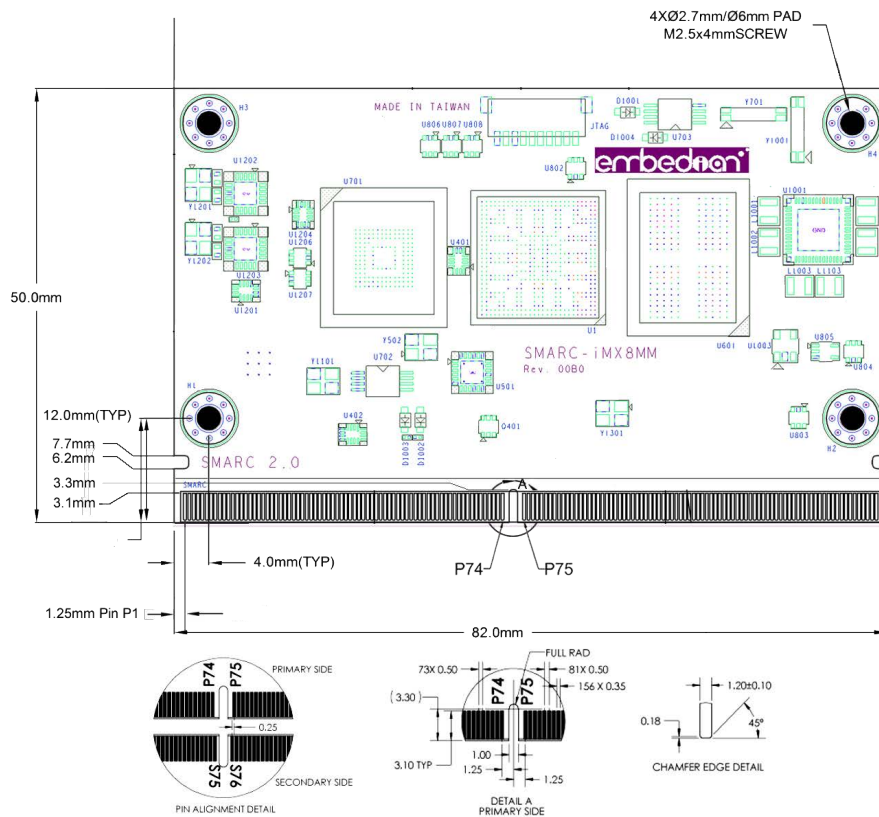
SMARC-iMX8MM Mechanical Drawings (Top View)
